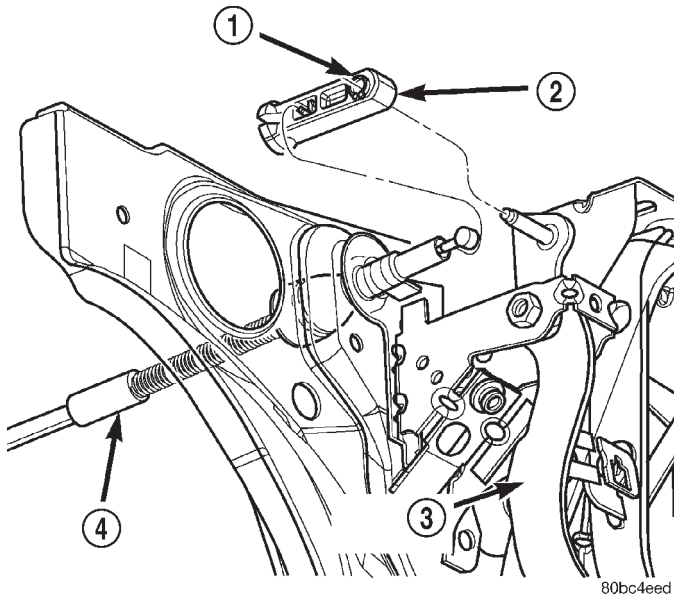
Clutch Cable at Brake/Clutch Pedal Assembly
